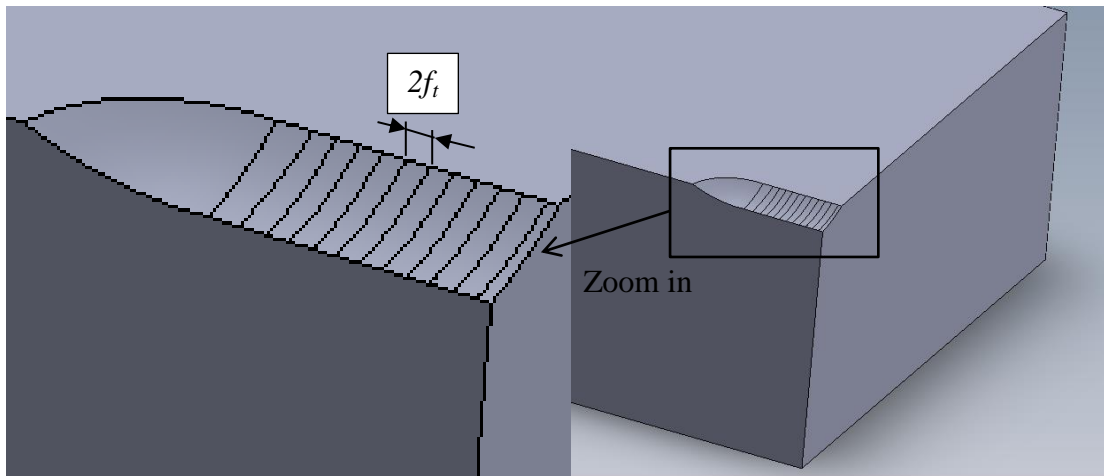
SolidWork Simulation of Surface Formation in Ball End Milling with Tool  $\text{\O}9.525$ , Depth of Cut 1mm , Chip Load 0.254mm/tooth.
